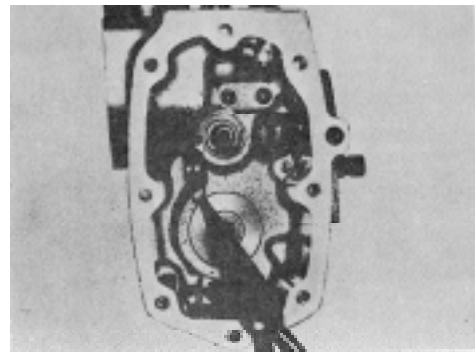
, F5299. Installing snap ring in throttle shaft
